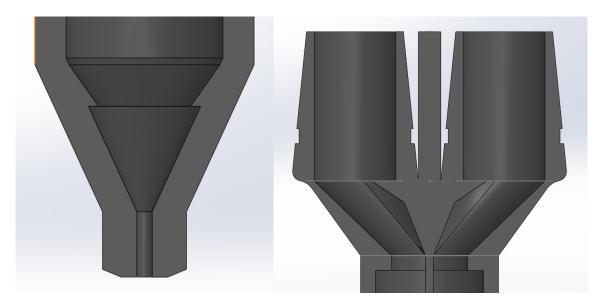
extrusion part of the static mixing nozzle Figure 3 part to insert the two ink compounds
